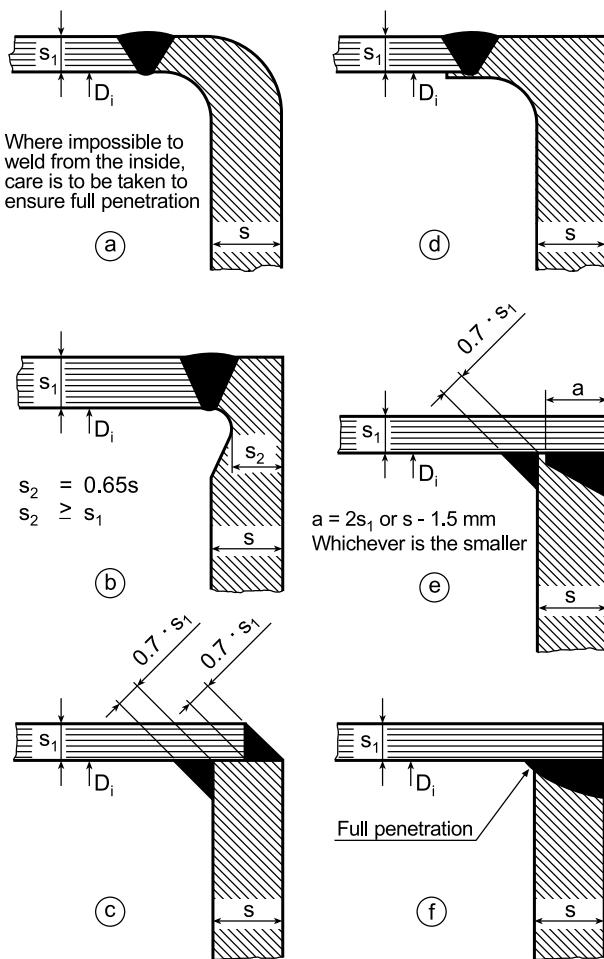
Acceptable methods of attaching flat end plates to cylindrical shells
